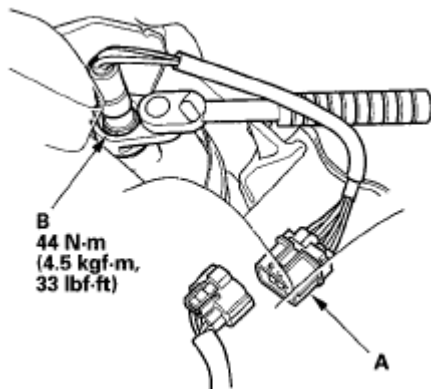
Identifying Rear A/F Sensor 8P Connector And Rear A/F Sensor With Torque Specifications
